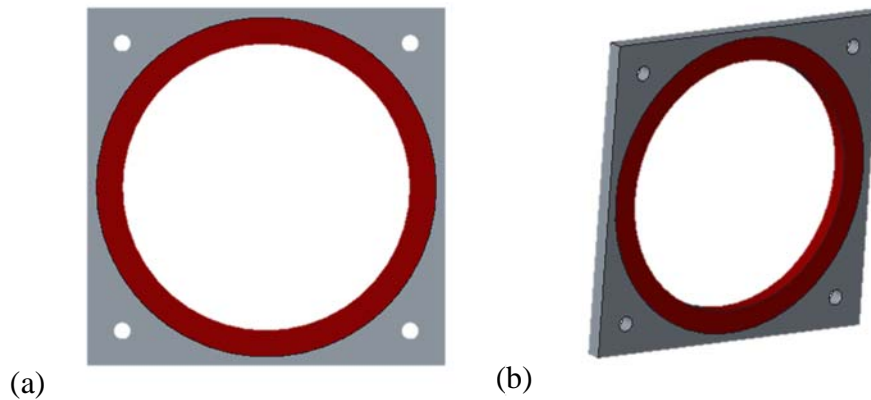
Computer aided drawing of the preliminary design of a secondary sealing device showing (a) the front face and (b) a rotated orientation for 3D view.
